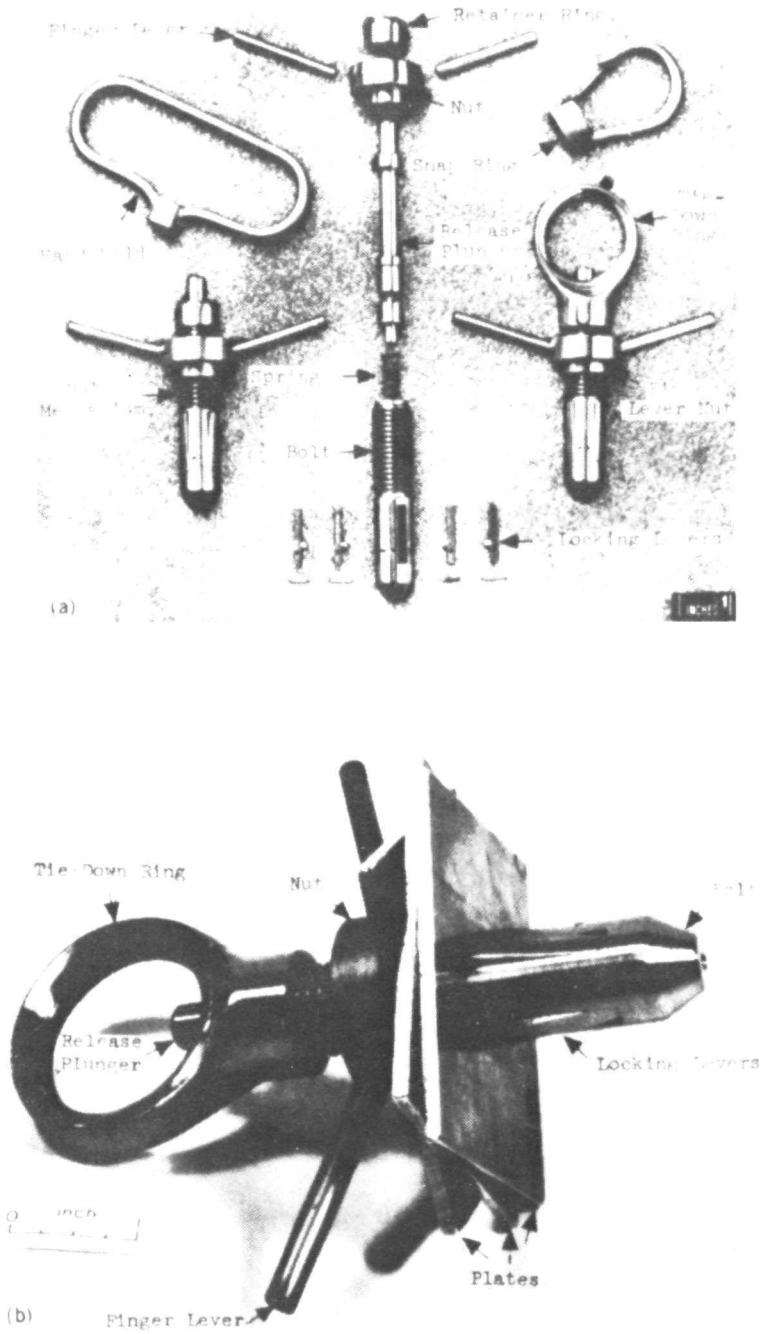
KUPU latch. (a) Components. (b) In operation joining three plates.
